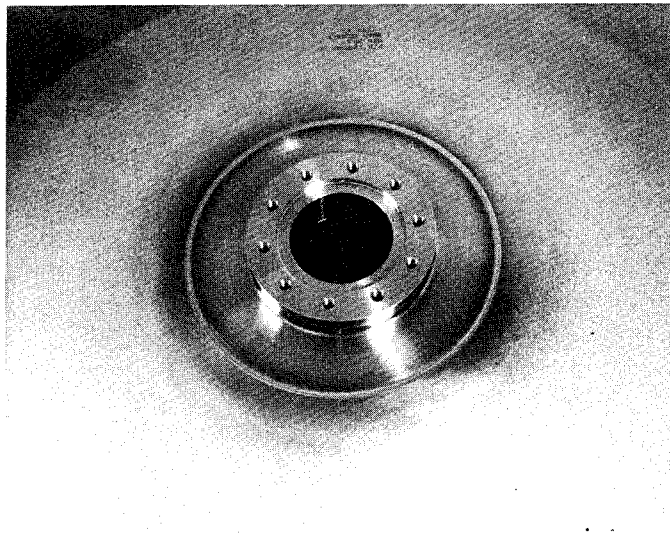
Boss-to-Head Weld, Exterior View
